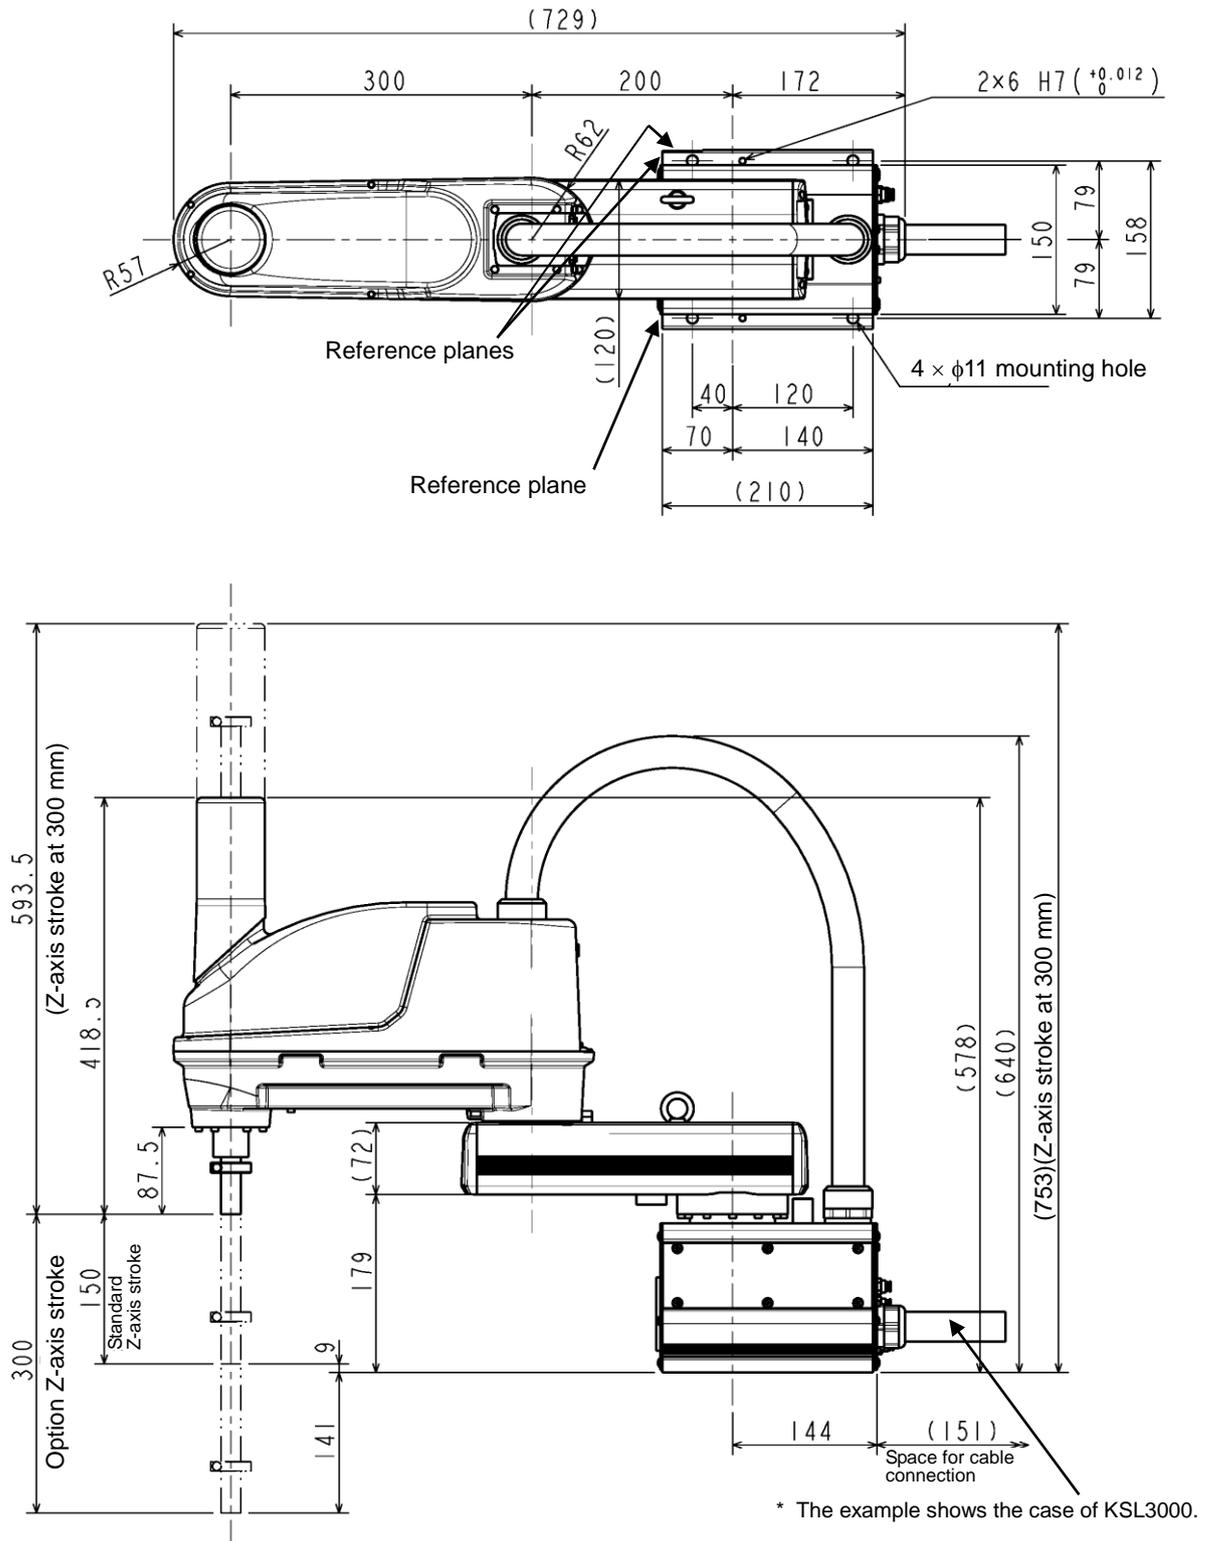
Outer dimensions of the robot (KHL-500NSCN)
